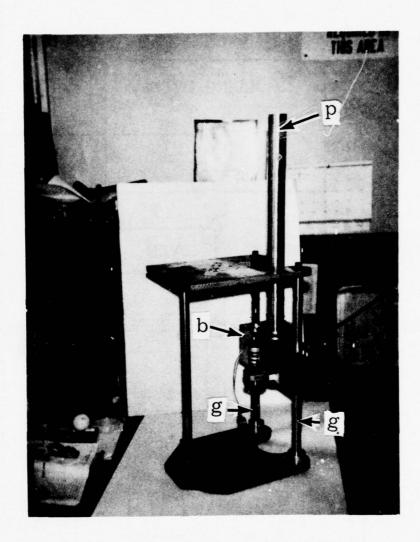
Pedestal Tube Assembly for Arc-Plasma Spraying.
